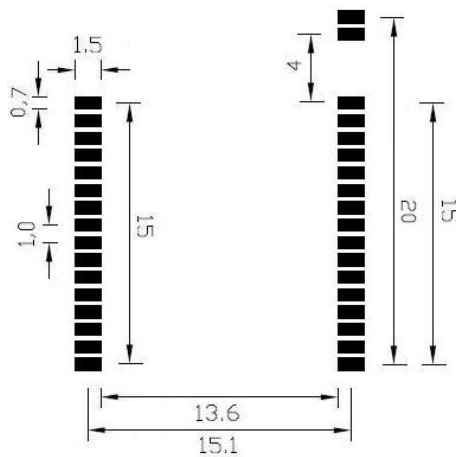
HPTZ01P-U0 module Recommended PCB footprint, Top View
